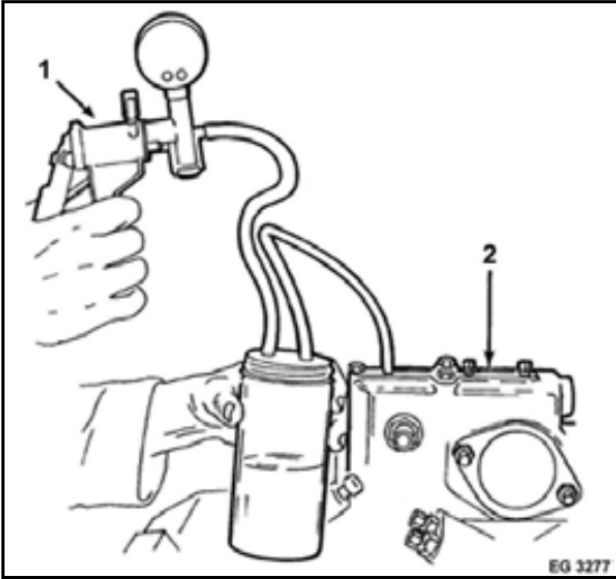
Removing Oil From High-pressure Oil Pump Reservoir
